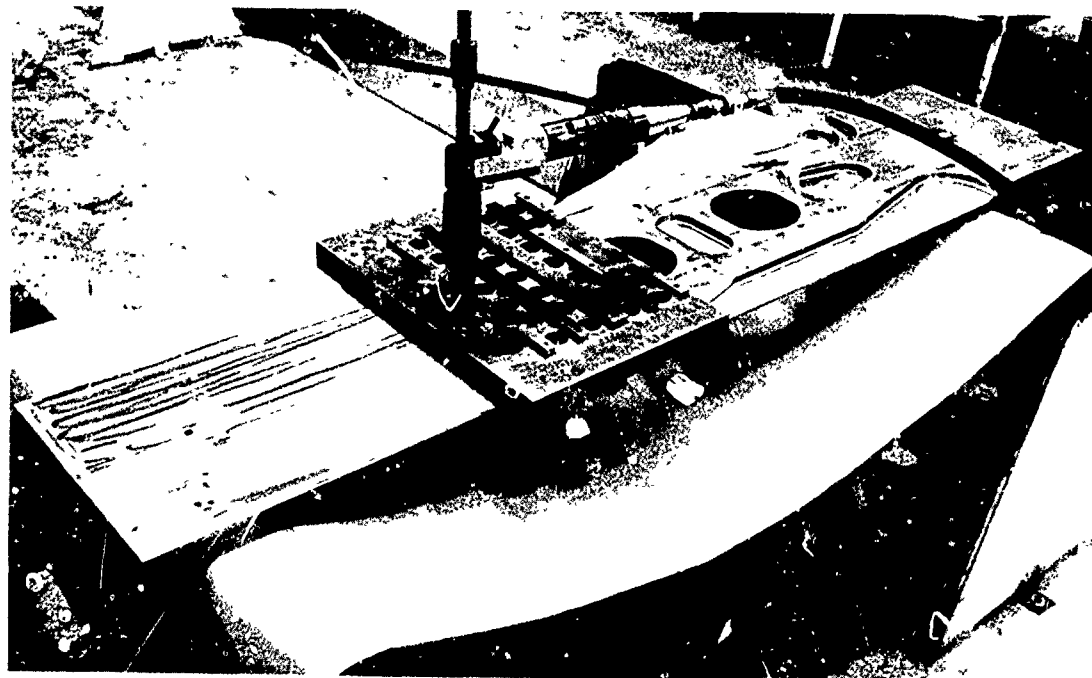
DRILL PLATE AND PORTABLE EQUIPMENT KIT USED TO POWER REAM TAPER-LOK HOLES IN 603FTB053
